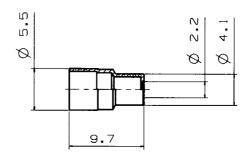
#3-2. Crimping ring (for 2.0mm cord)
